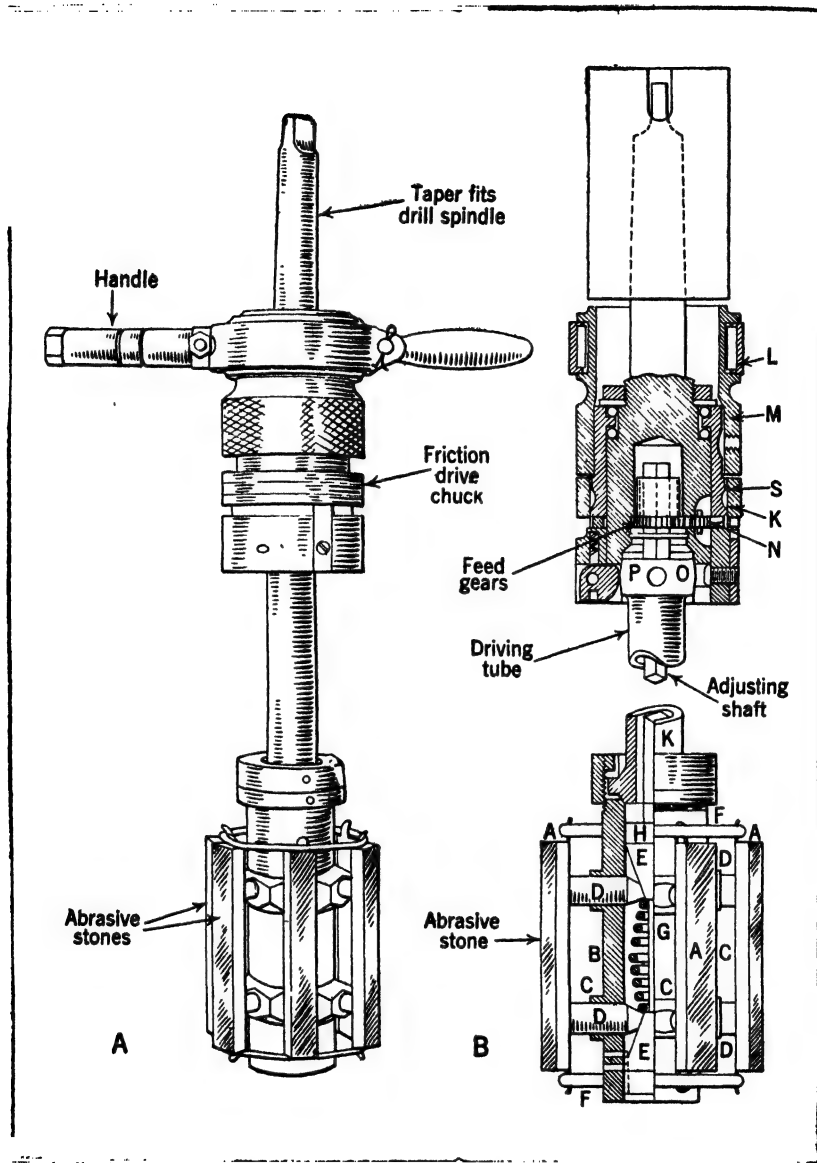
Hutto Cylinder Grinder and Friction Type Driving Head Shown at A. The Floating Driving Bar which Encloses a Square Adjusting Shaft and Driving the Grinder Head is Shown in Sectional View at B.
